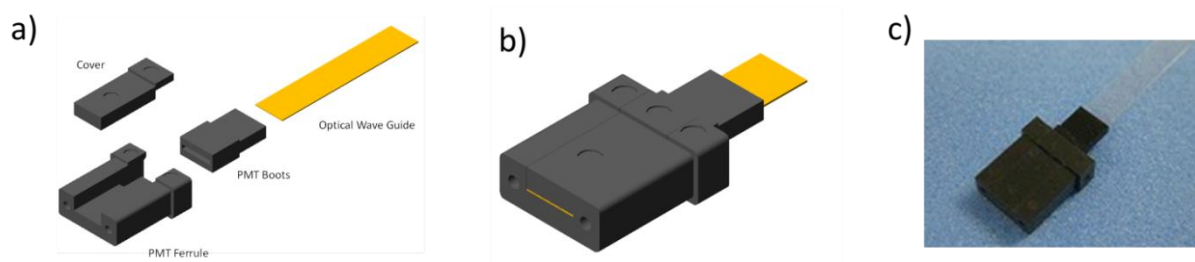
IEC polymer MT (PMT) ferrule standard for the termination of optical waveguides a) PMT connector components, b) PMT connector structure after assembly, c) photo of commercial PMT assembled onto a polymer waveguide strip
